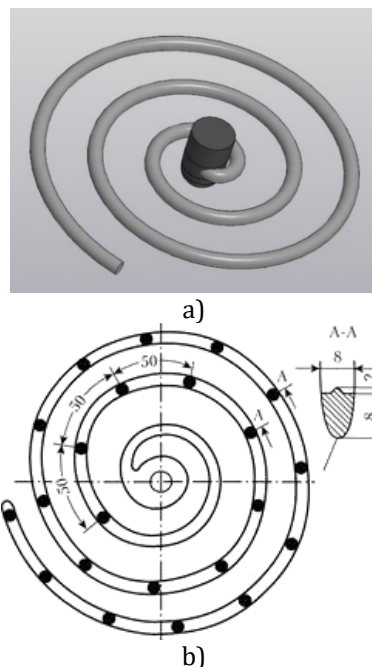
Spiral sample for fluidity determination a) spiral sample 3D view b) spiral sample dimensions
